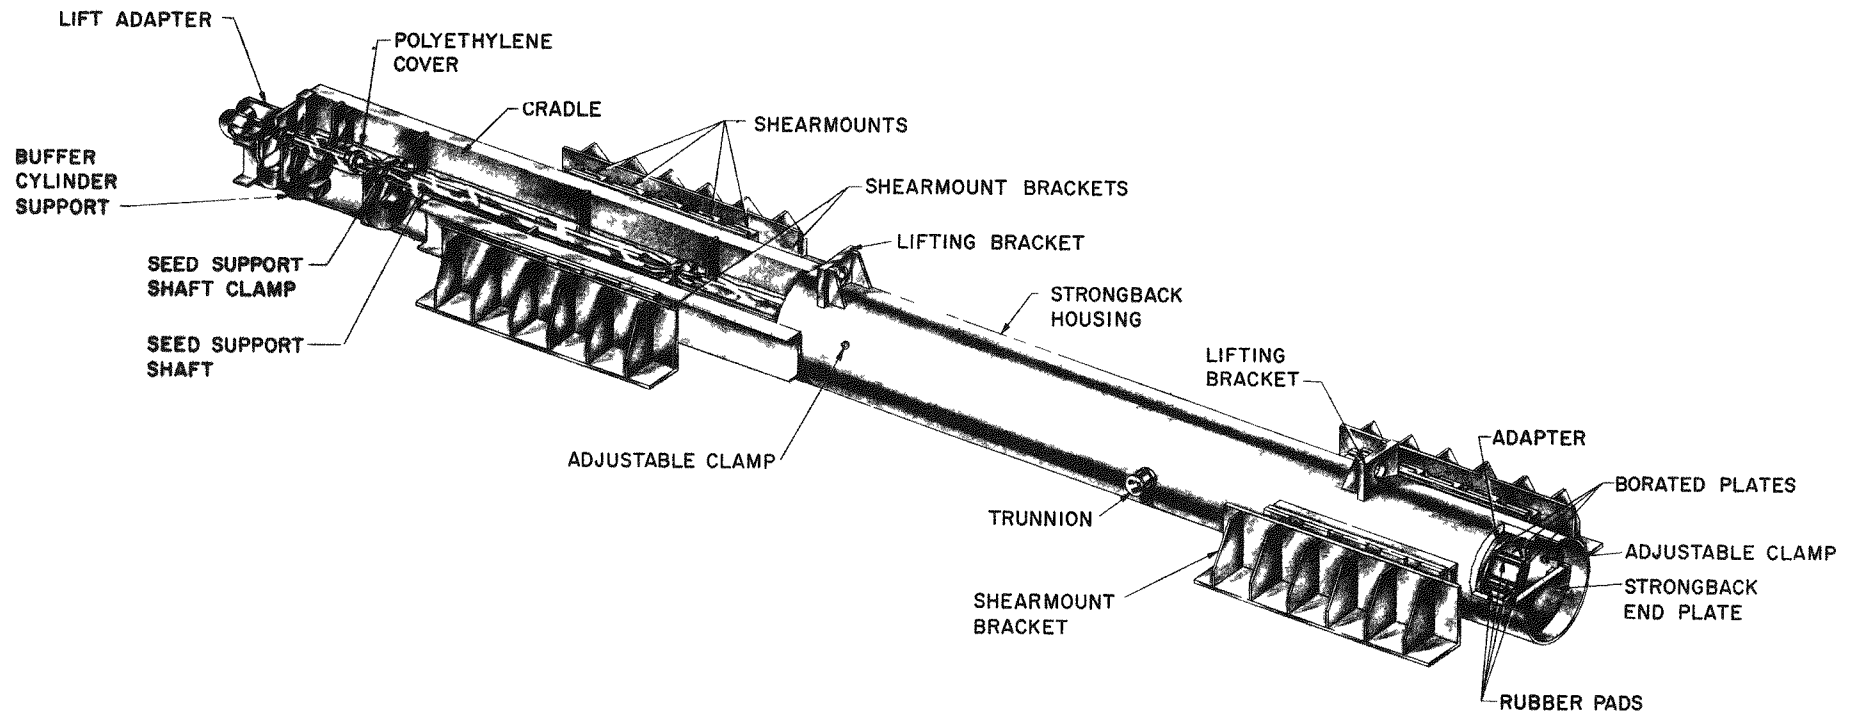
LWBR MOVABLE FUEL STRONGBACK ASS'Y
